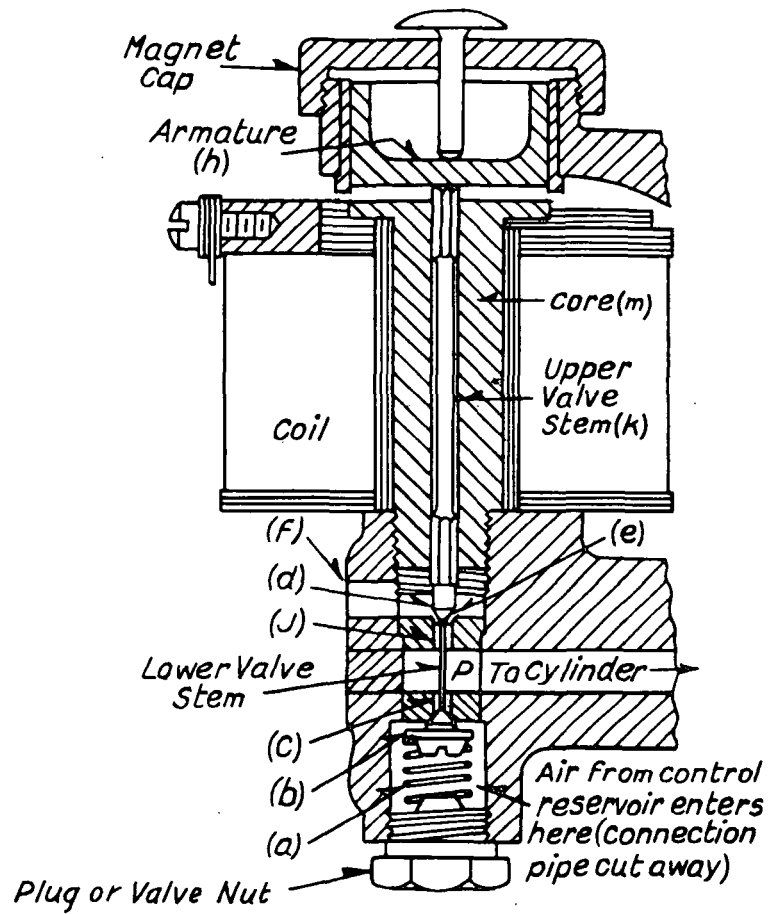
Cross Section of Westinghouse Open-Coil Type Standard Magnet Valve
